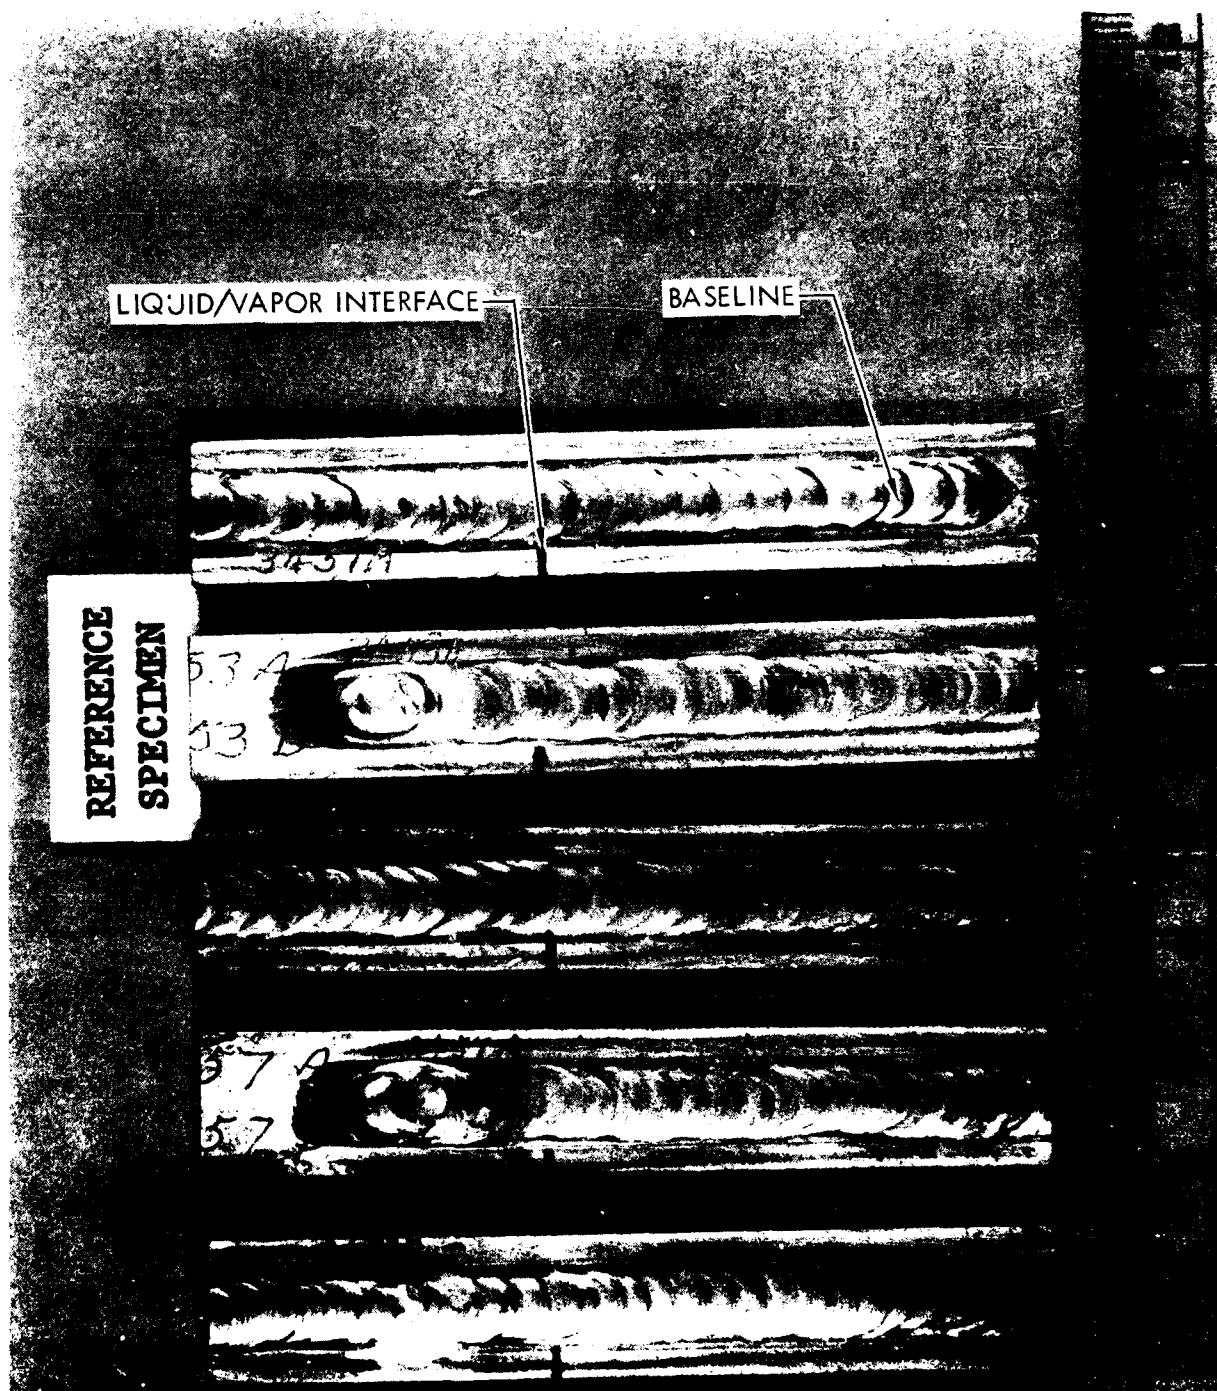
Aluminum Alloy Type 5456 — Specimens: Posttest
